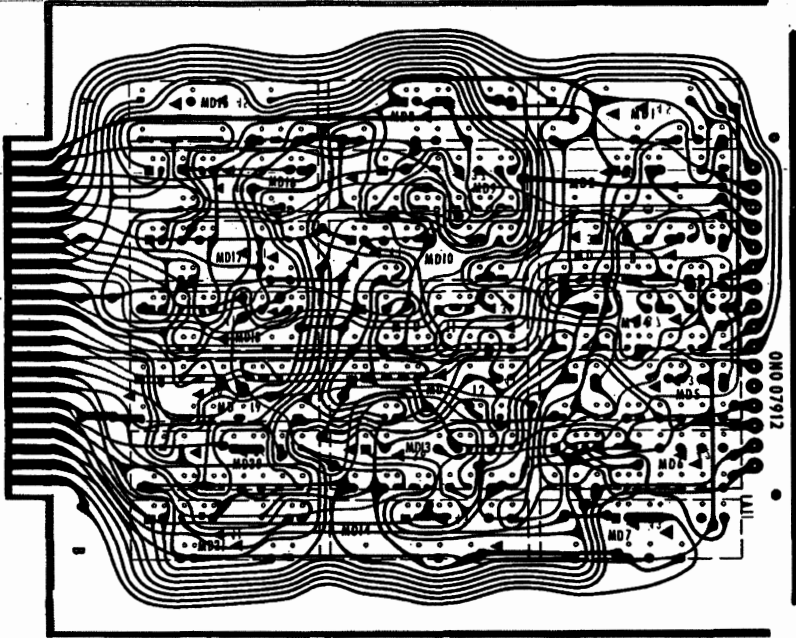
Card E-AJU Printed-Circuit Layout.
